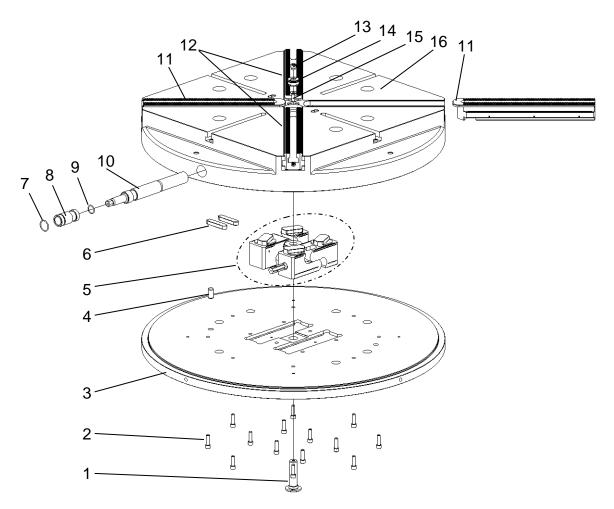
Disassembly / Re-assembly of the chuck (VD100 – VD120)
